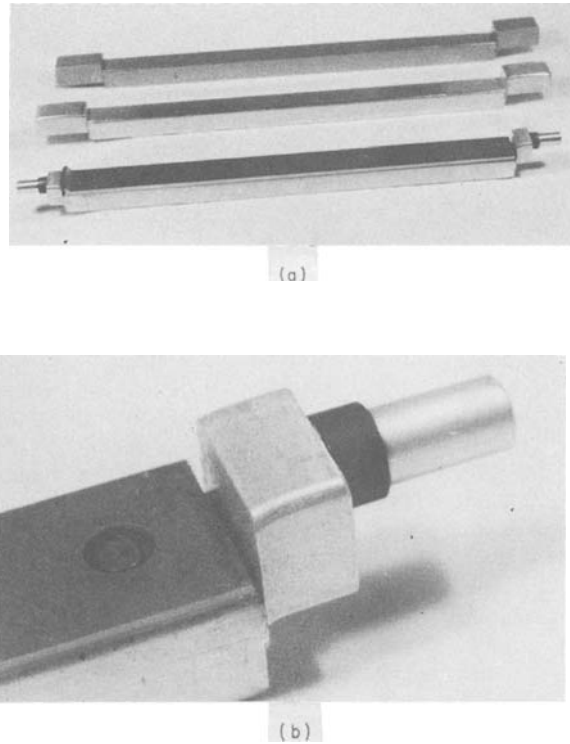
Appearances of shear-formed products (a) Upper: pure iron; middle: Al-63S; lower: final product of Al-63S. (b) Shear-formed part of final product.
